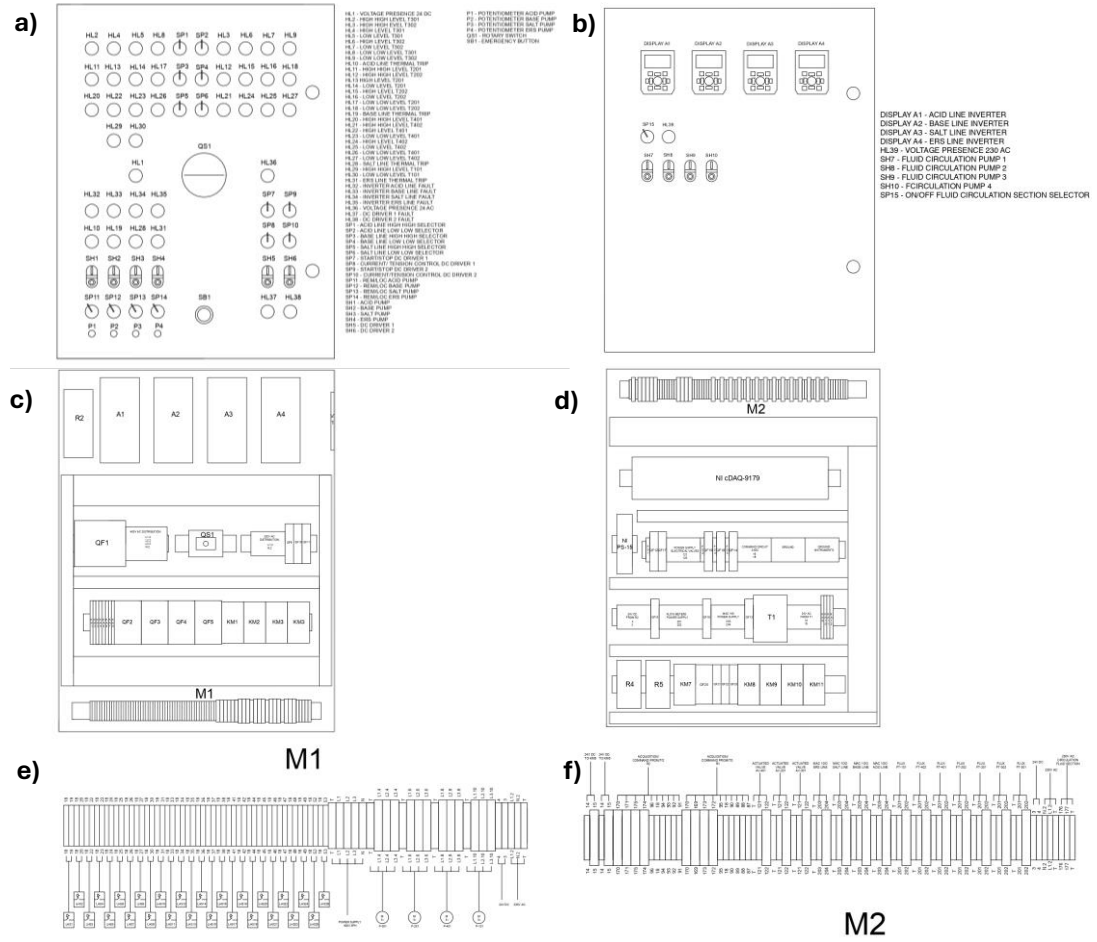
2D CAD showing the layout of the electrical cabinets utilized in the pumping station. a) front view of the upper cabinet; b) front view of the lower cabinet; c) interior layout of the upper cabinet; d) interior layout of the lower cabinet; e) enlargement of the upper cabinet terminal connection box; f) enlargement of the lower cabinet terminal connection box.
